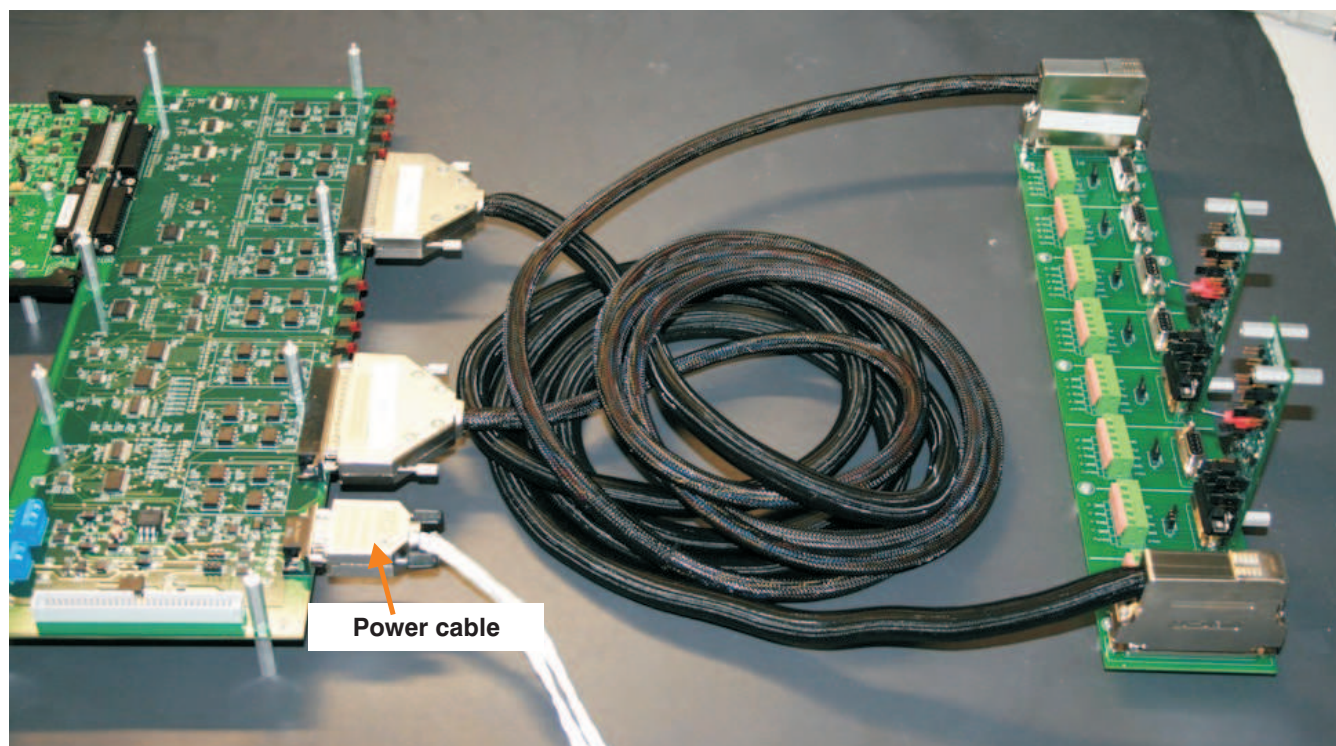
Connect Multi-Cal-Power Cable to Multi-Cal-Master PCA Card
